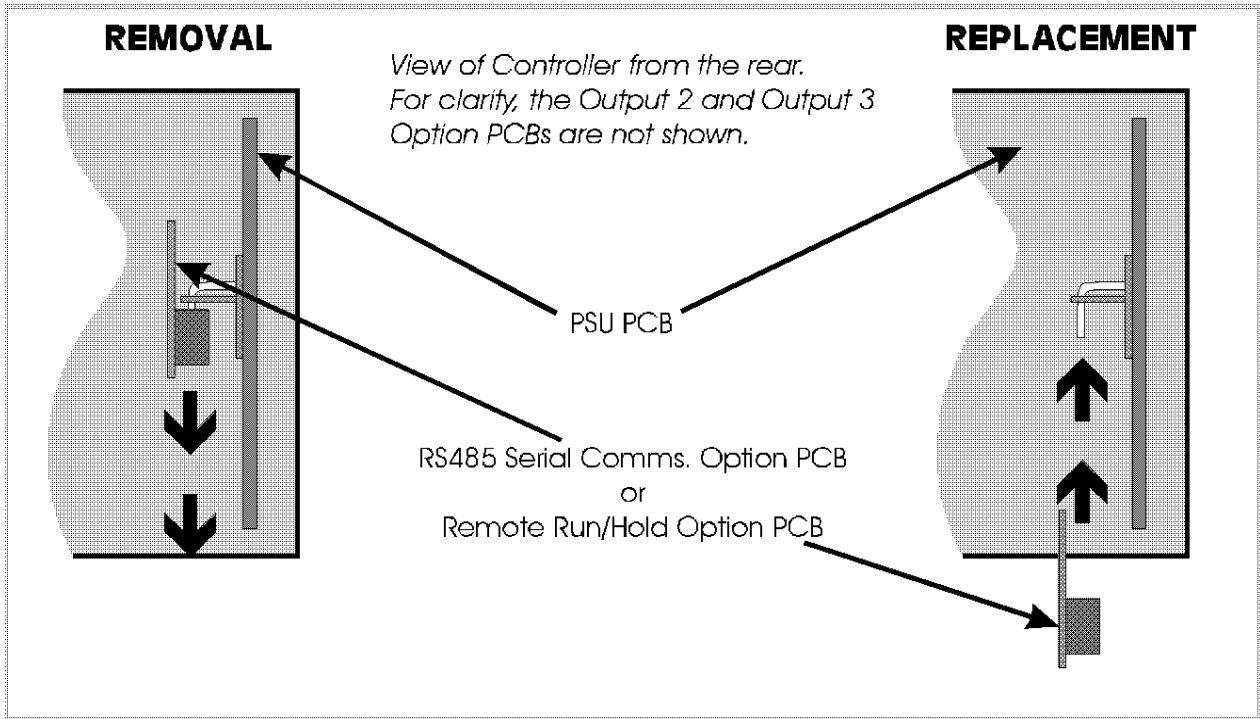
Removing the RS485 Communications Option PCB or the Remote Run/Hold Option PCB
